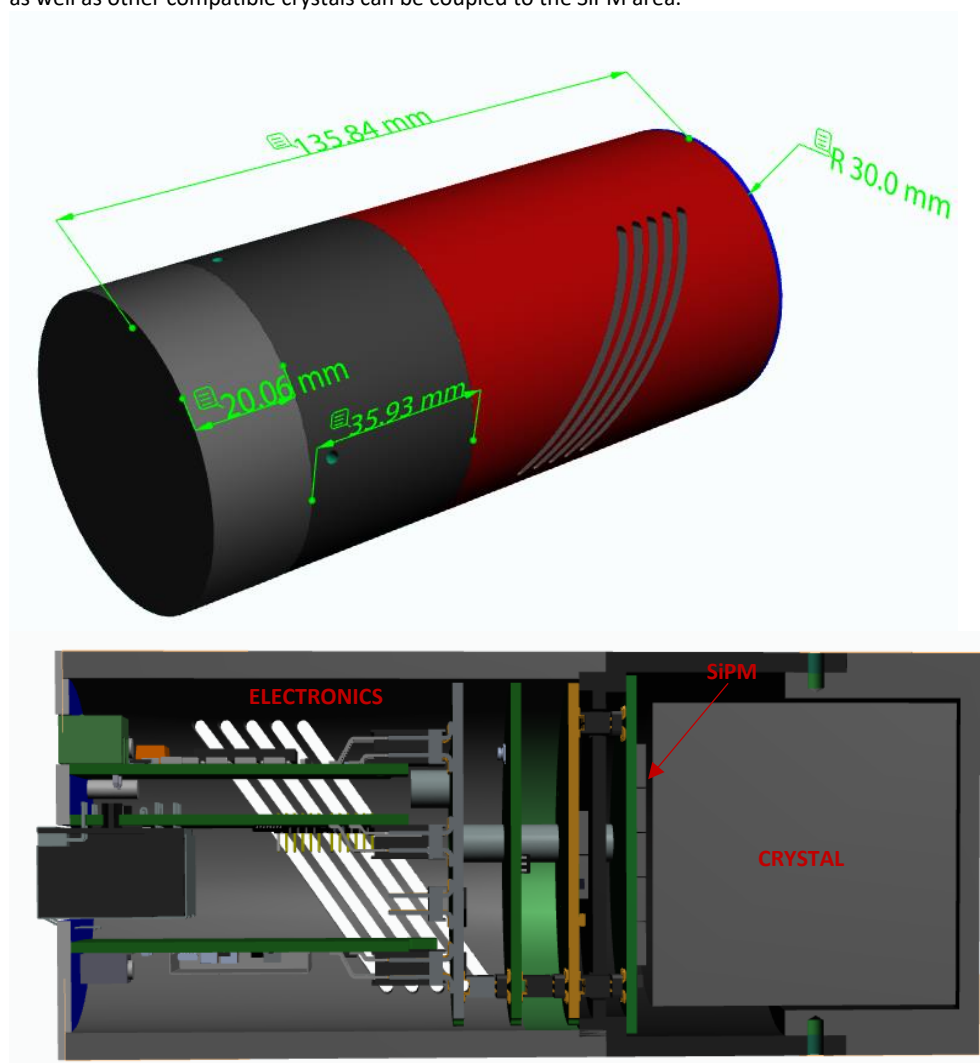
general view (top) and cross-section view (bottom) of the i-Spector in ASSEMBLY version. The dimensions of the external housing (here in mm) are identical for all models. In the bottom view, is shown the maximum possible dimensions for a scintillation crystal (ø 1.5" x 1.5" h) housed in the standard holder.
